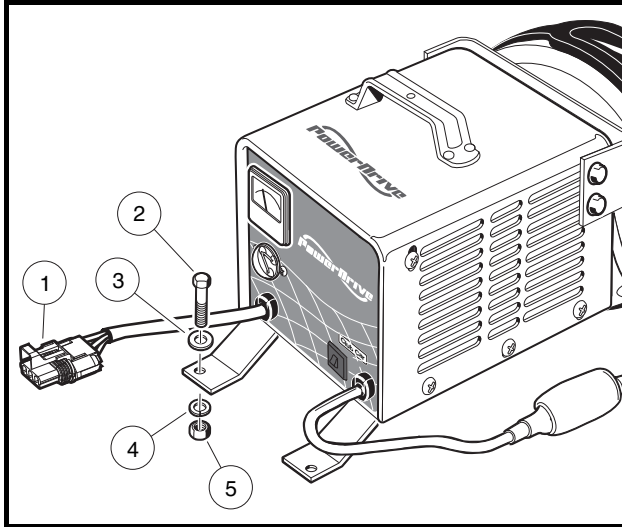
Onboard Charger Mounting – Precedent Vehicles
